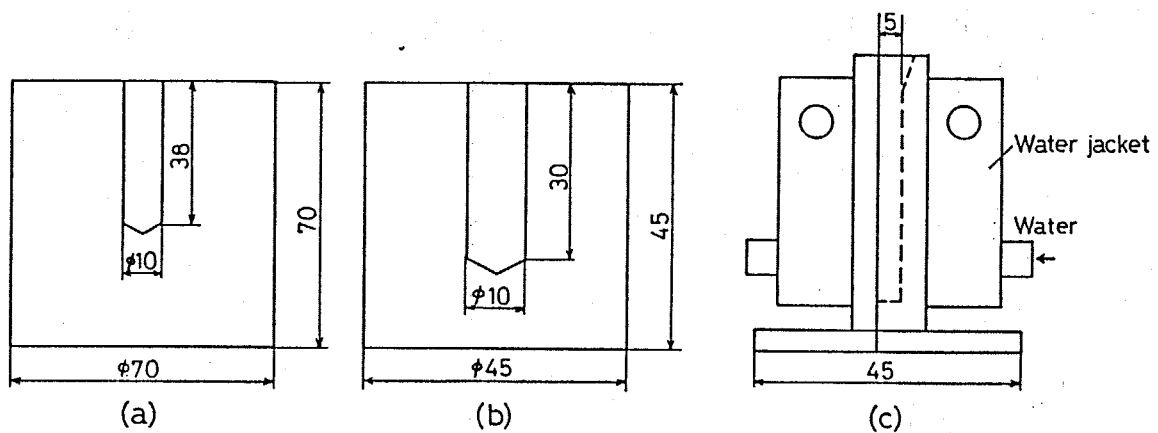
Molds for rapid cooling. (a) Cylindrical graphite mold. (b) Cylindrical copper mold. (c) Plate-like copper mold equipped with water jackets.
